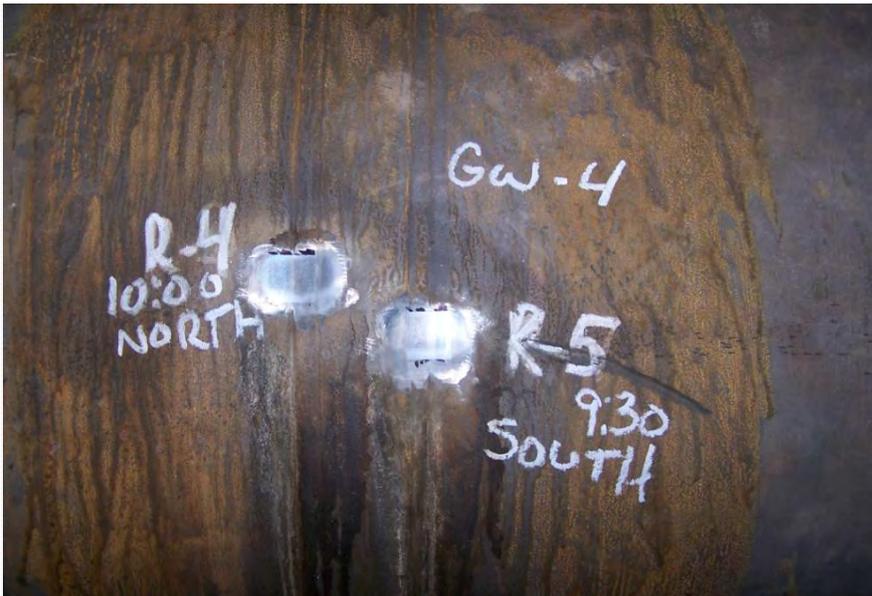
Photographs of the inspection locations on the Upper Finishing Superheater Outlet header.
